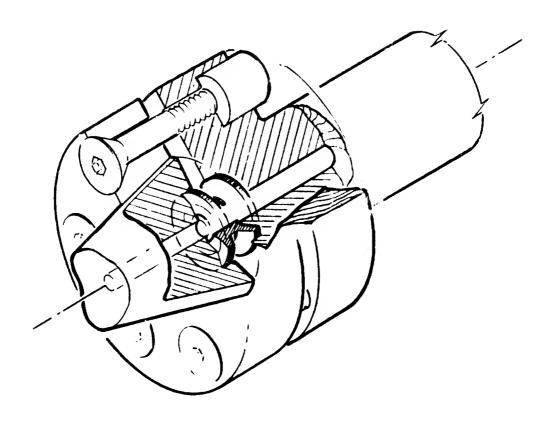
PICTORIAL VIEW OF MOUNTING OF TRANSDUCER UNIT WITH THE BOBBIN SEAL
